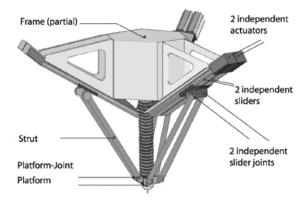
Hexam, prototype 2 from Toyoda Machine Works, Japan; A SKM milling machine
